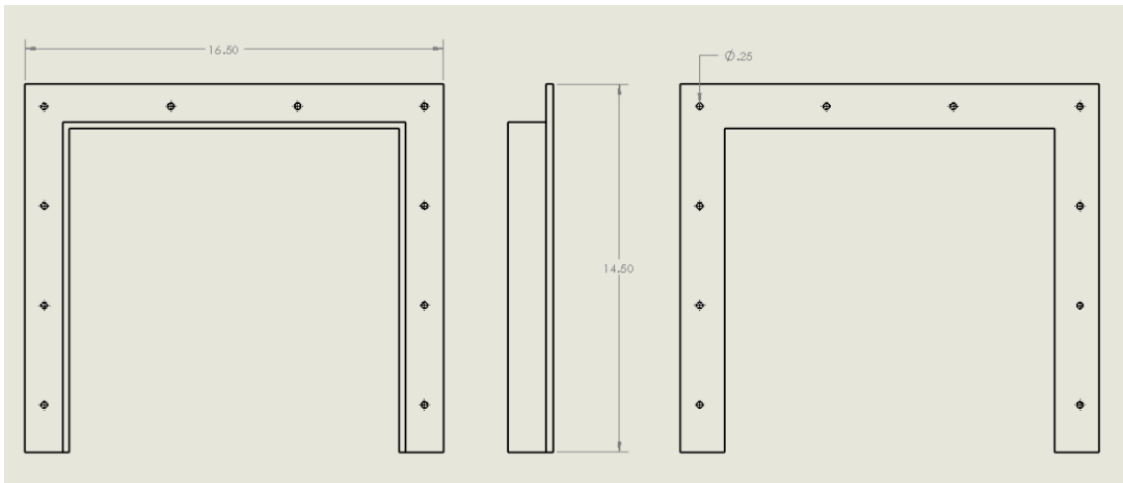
Orthographic projection views of the Diffuser and Test section side flanges marked with basic dimensions.
